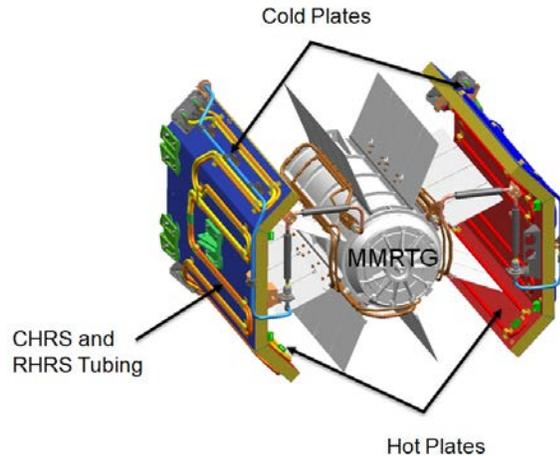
RHRS Heat Exchanger Assemblies, Red Face sheets-Hot Plates, Blue Face sheets-Cold Plates
